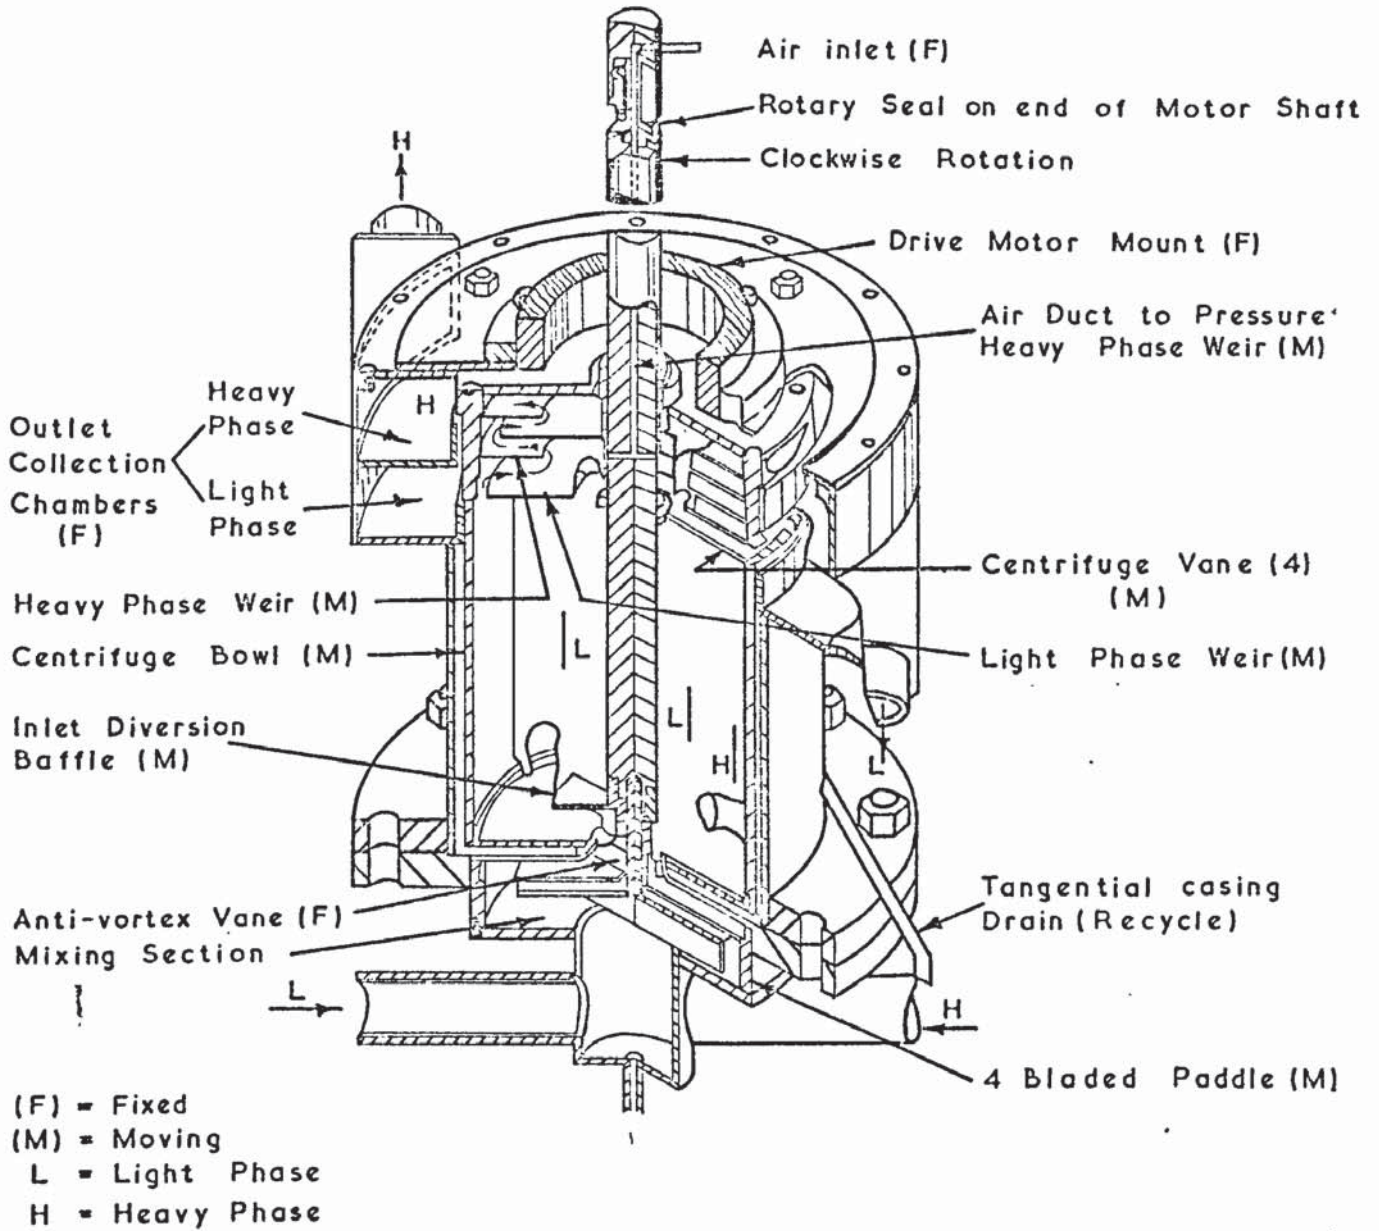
SECTION VIEW OF THE 10 - INCH CENTRIFUGAL CONTACTOR
